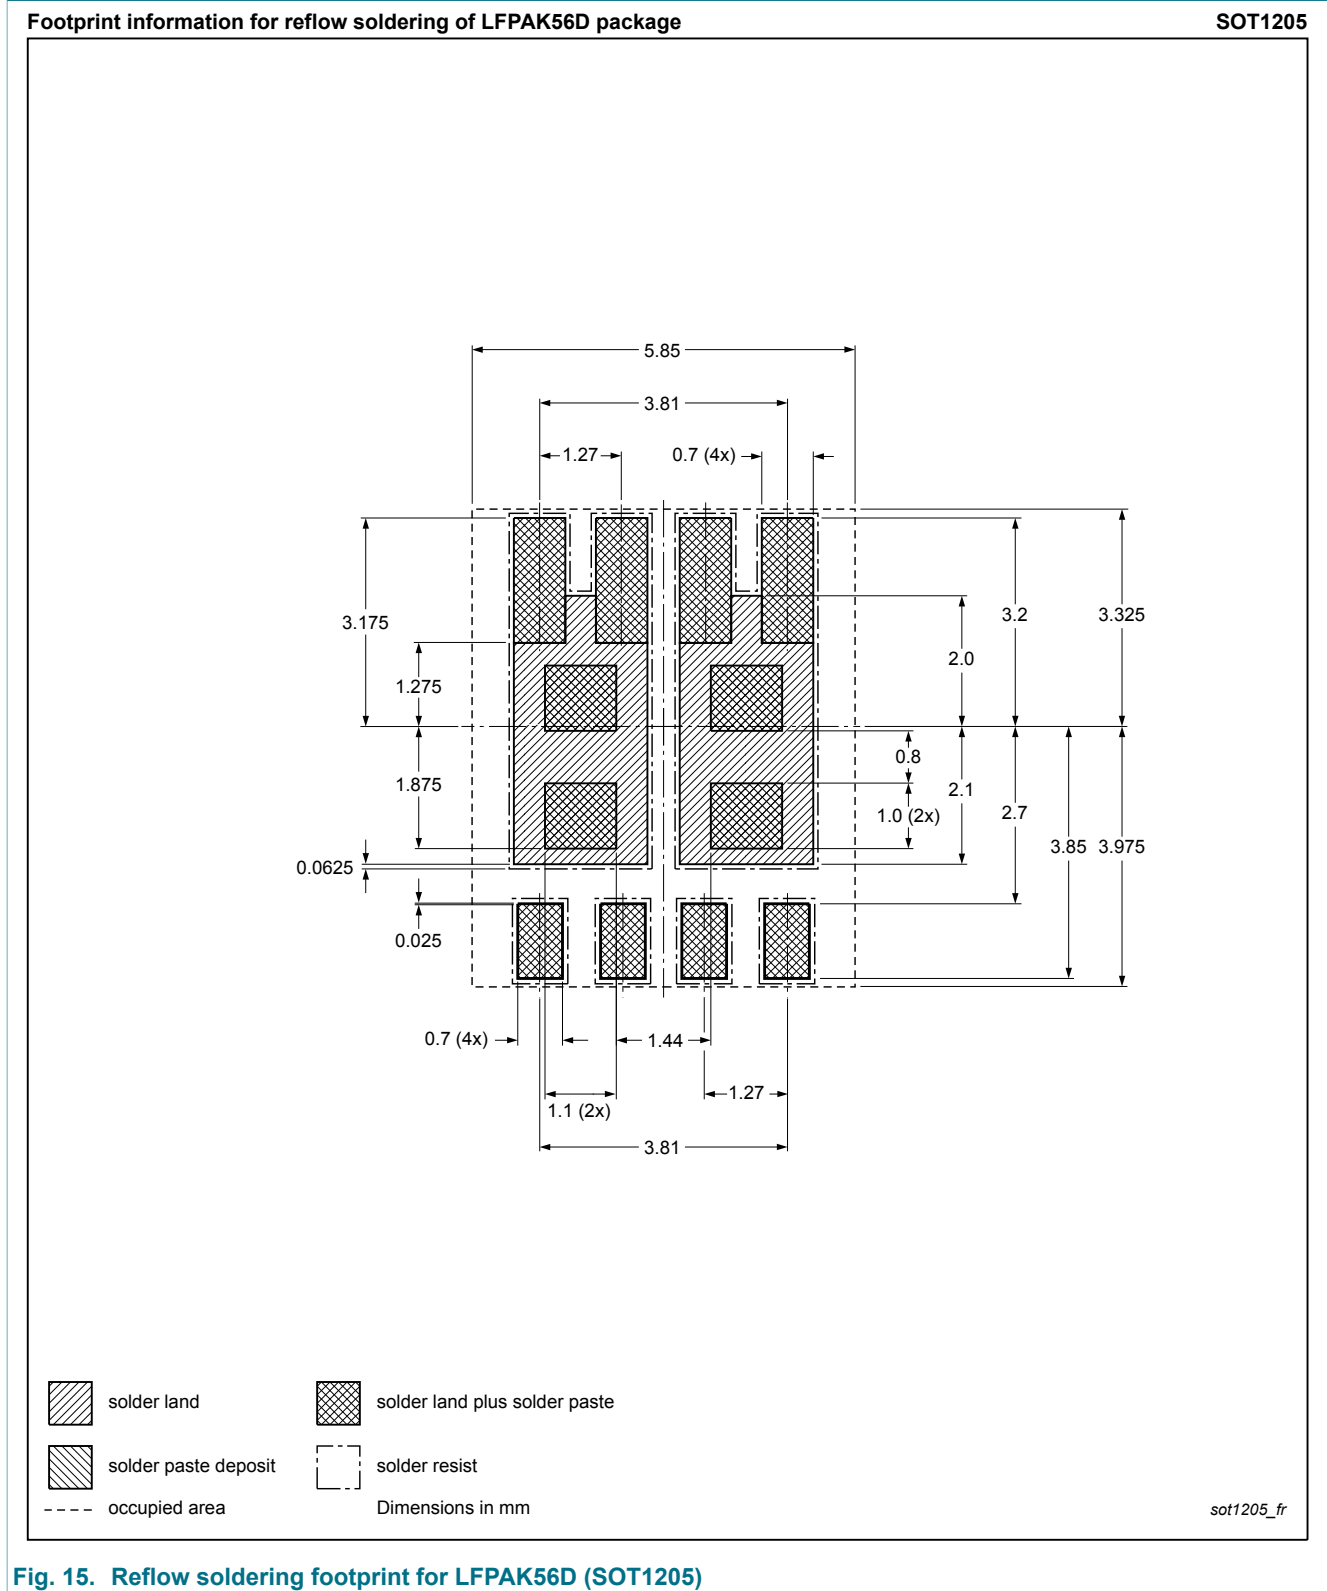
Reflow soldering footprint for LFPAK56D (SOT1205)
